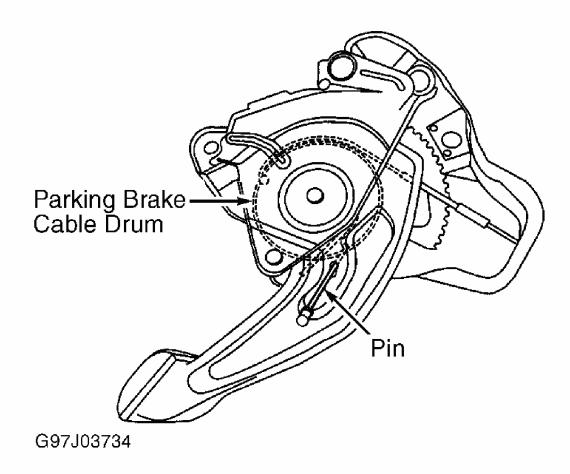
Locking Parking Brake Lever (Savana & Express) Courtesy of GENERAL MOTORS CORP.
